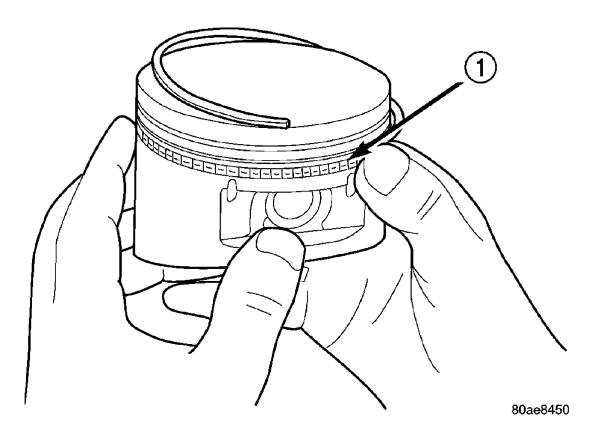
Installing Side Rail Courtesy of CHRYSLER LLC
